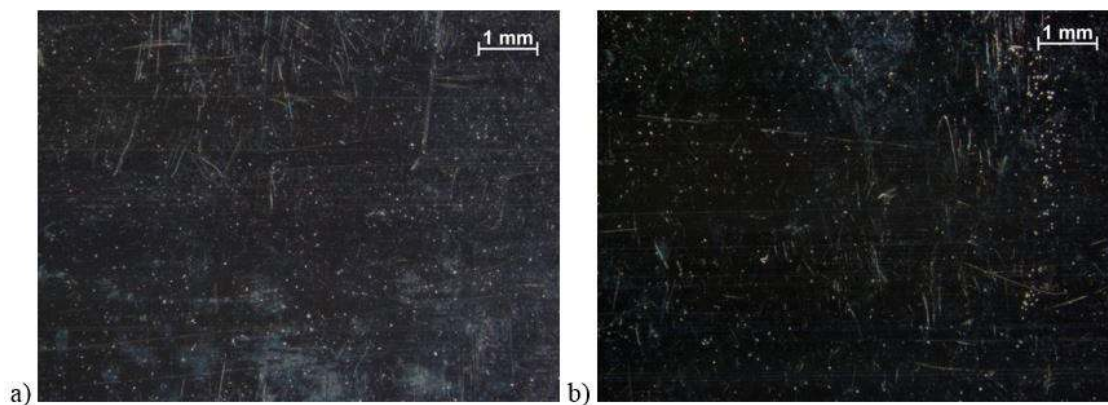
Examples of mechanical damage to the inner surface of the plates:
